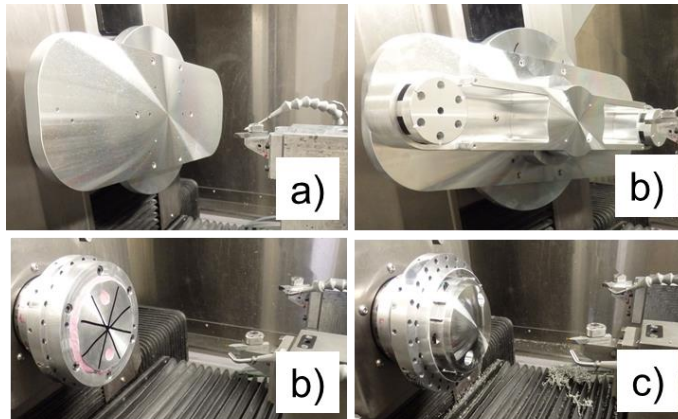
Phase of SPDT a) is the interface between the FH and the Lathe spindle b) the FH-A mounted on the Lathe c) is the interface between HS and the Lathe spindle d) the HS mounted on the Lathe.
